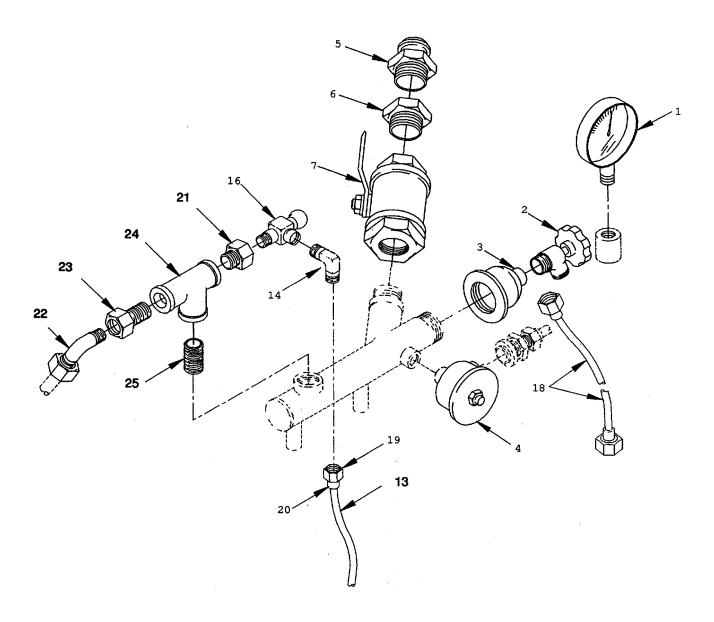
PRESSURE RELIEF VALVE AND THERMOSTAT ASSEMBLY (SHEET 2 OF 2, MODEL M85)
